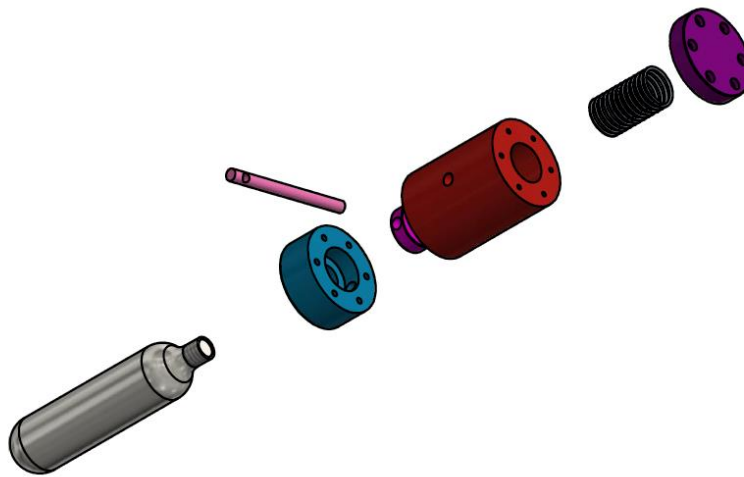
Exploded CAD view of CO₂ piercer mechanism
